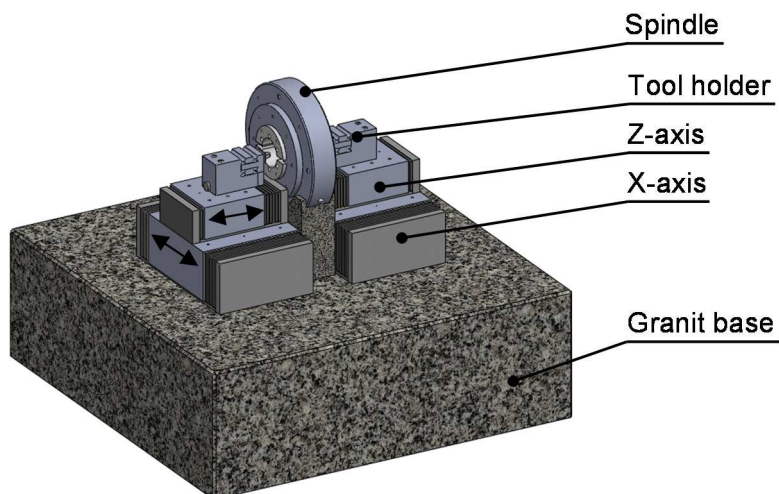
Machine tool concept for two-side machining of optical elements [1]
